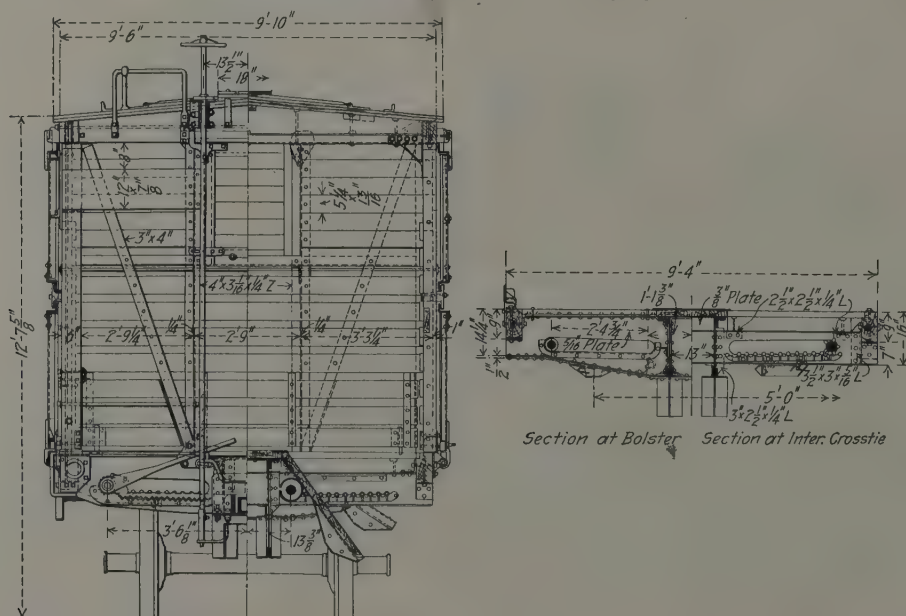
End Elevation and Cross Sections of Steel Frame 40-Ton Capacity Drop Bottom Stock and General Service Car. National Dump Car Company.
